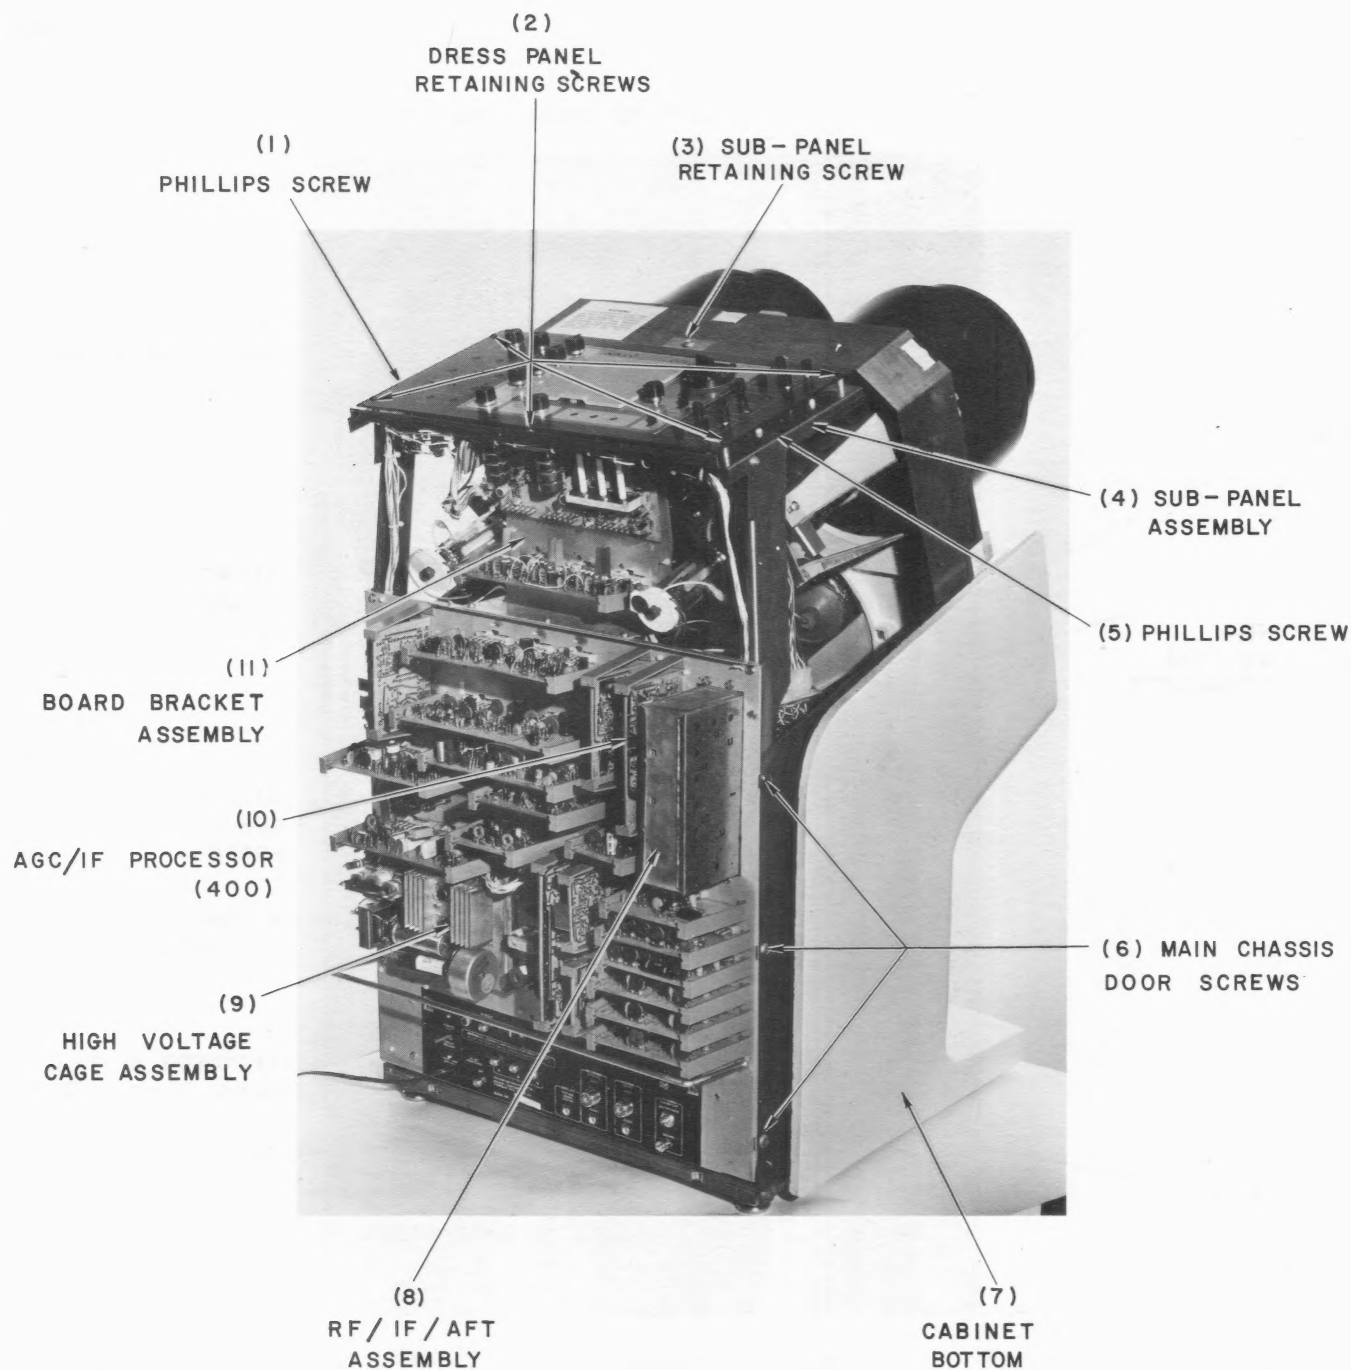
SIDE VIEW WITH CABINET TOP REMOVED
